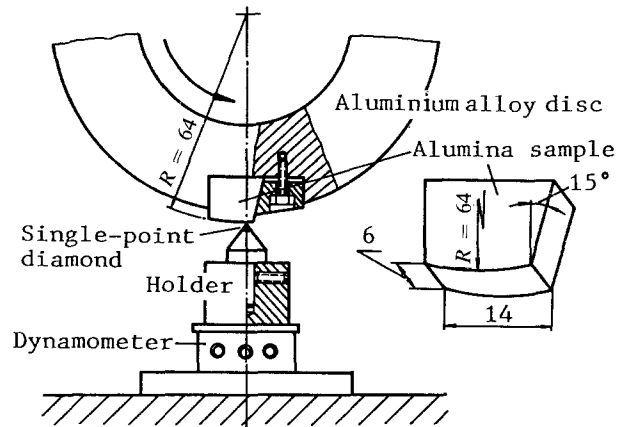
Geometry and dimensions of alumina sample and schematic arrangement of the scratching equipment. Dimensions in millimetres.
